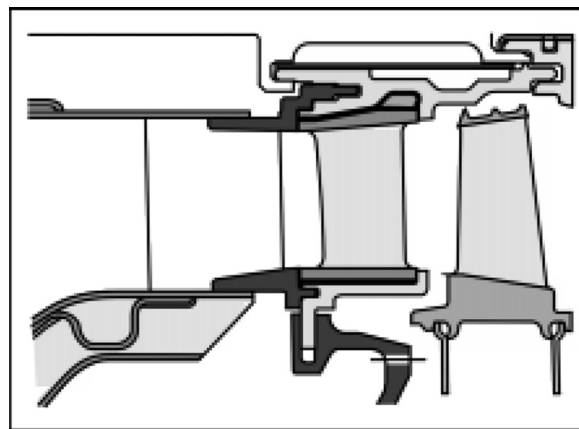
Ceramic vane mounting arrangement [15-4].
